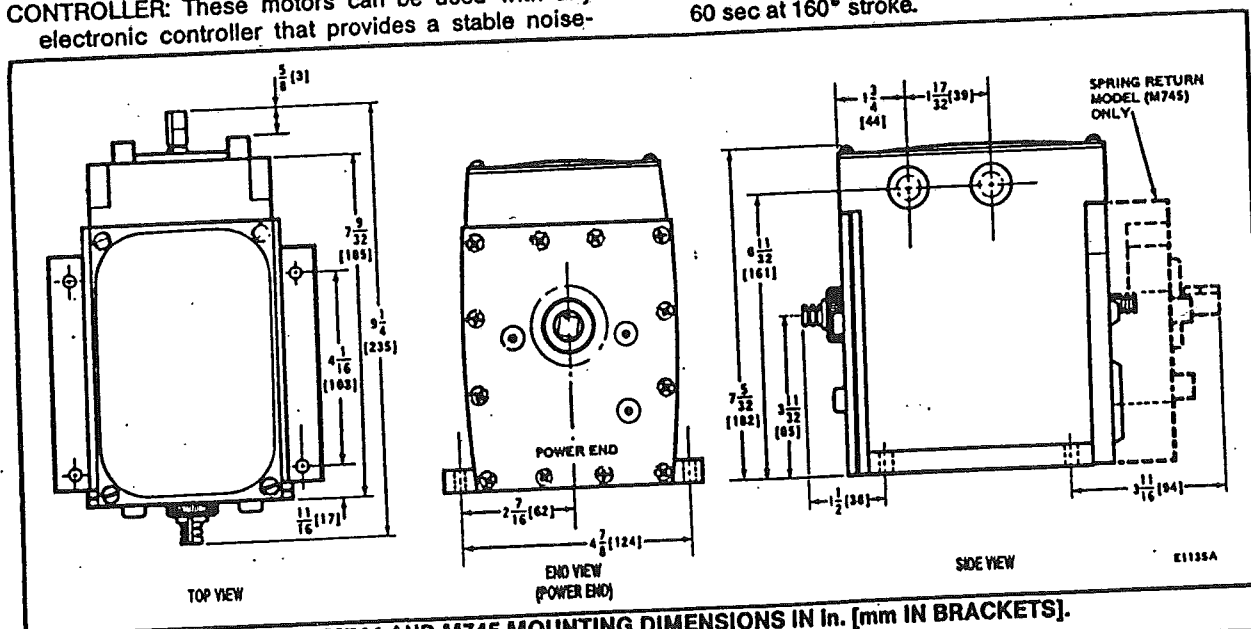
M744 AND M745 MOUNTING DIMENSIONS IN IN. [MM IN BRACKETS].
